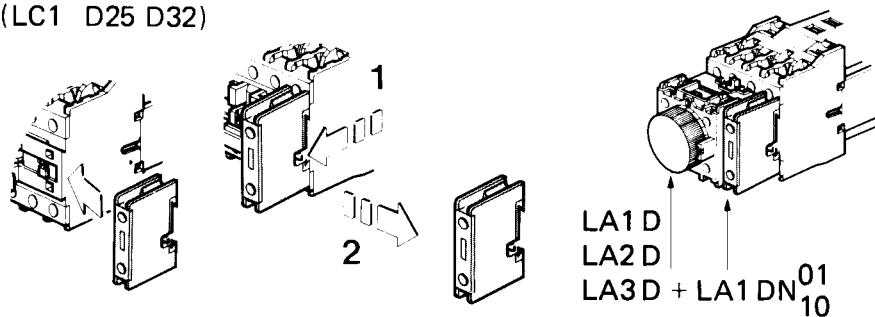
Mounting Interface Modules, Top Mounted Contact Block and Coil Suppressor to Contactors / Coil Replacement
